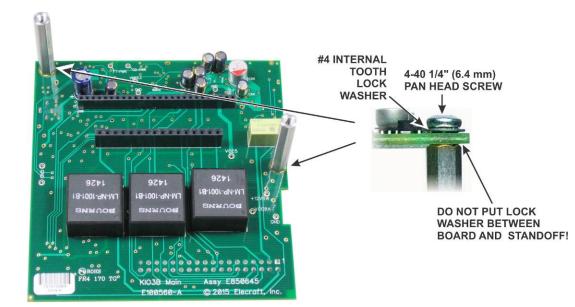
Mounting Standoffs on the KIO3B Main Board.
